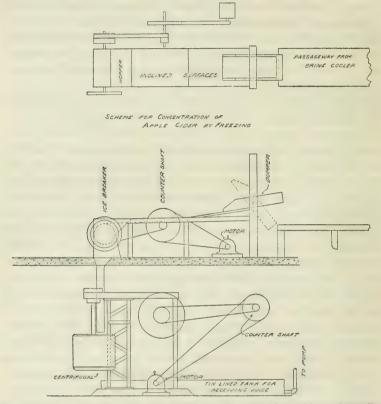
Dumper, ice breaker, and centrifugal machine used in crushing and centrifugalizing frozen apple juice.
